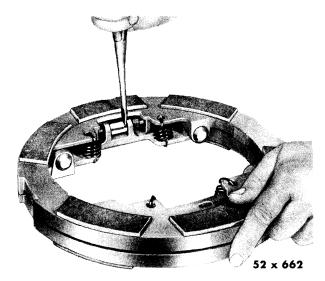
Releasing Automatic Adjuster (Front or Rear Pressure Plate)
